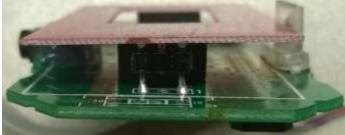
Connection between RFID antenna PCB and RFID reader PCB
